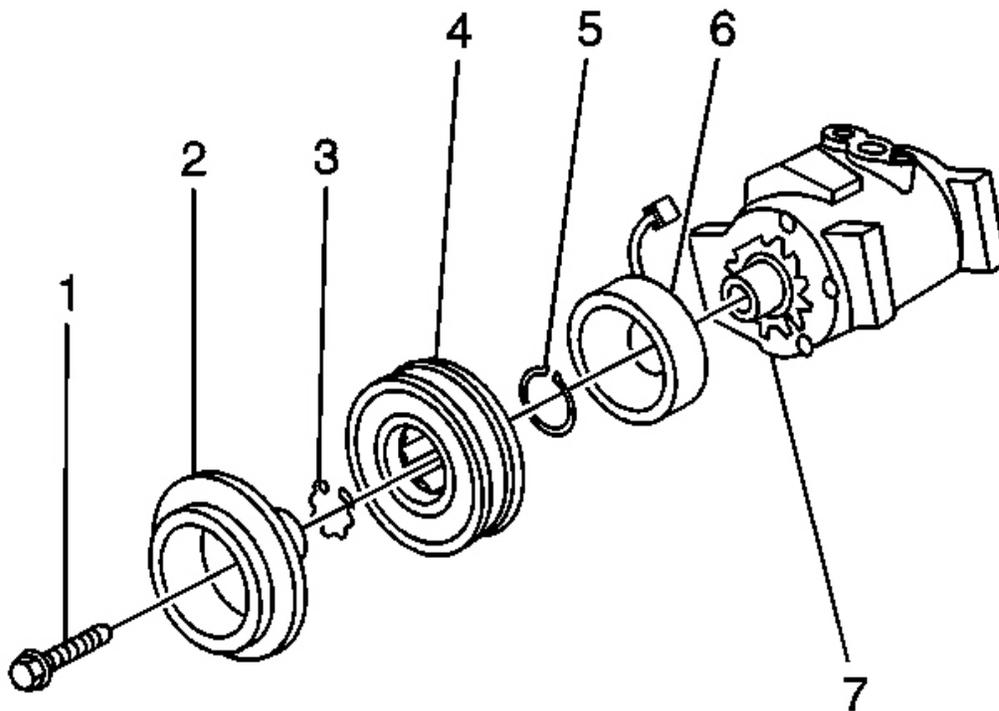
Exploded View Of Compressor Clutch Plate Assembly
